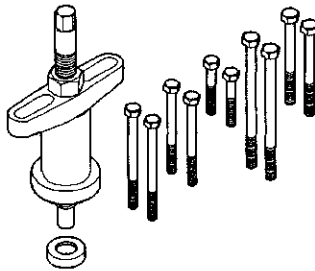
Crankshaft Pulley/Damper Installer Tool C3688
